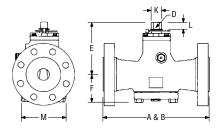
, Sizes 21/16 to 41/16 Fig. 76505, Sizes 21/16 to 41/16
